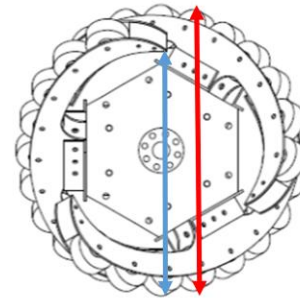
Side view of Spiral Mecanum Wheel (Red arrow: Wheel diameter, Blue arrow: The maximum height that the wheel can catch and climb a step)
